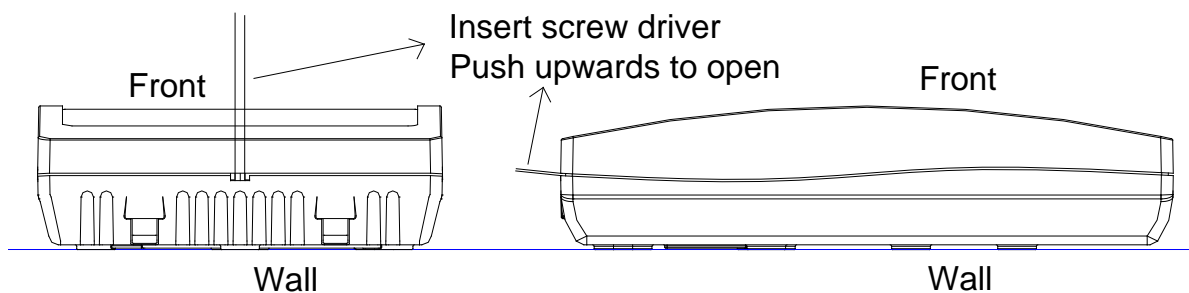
Closed housing seen from the top and the side. The housing is opened by inserting a screw driver and pushing to the front side of the housing. The locking hooks will then be released.
